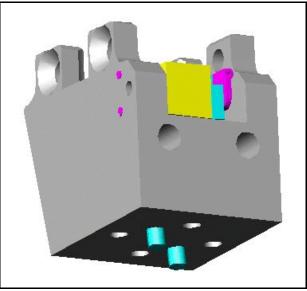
Pelvis/Lumbar Mounting Block Assembly
